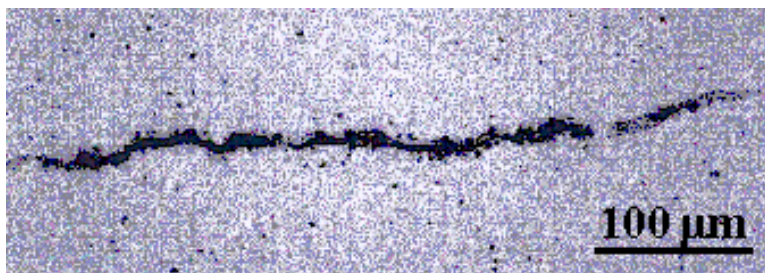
weld seam defect due to insufficient pressure in the weld chamber
